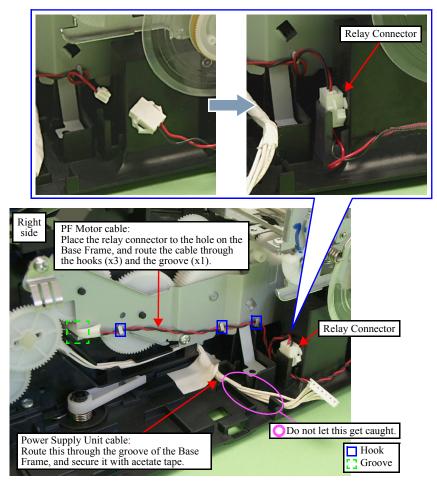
PF Motor Cable, Power Supply Unit Cable
